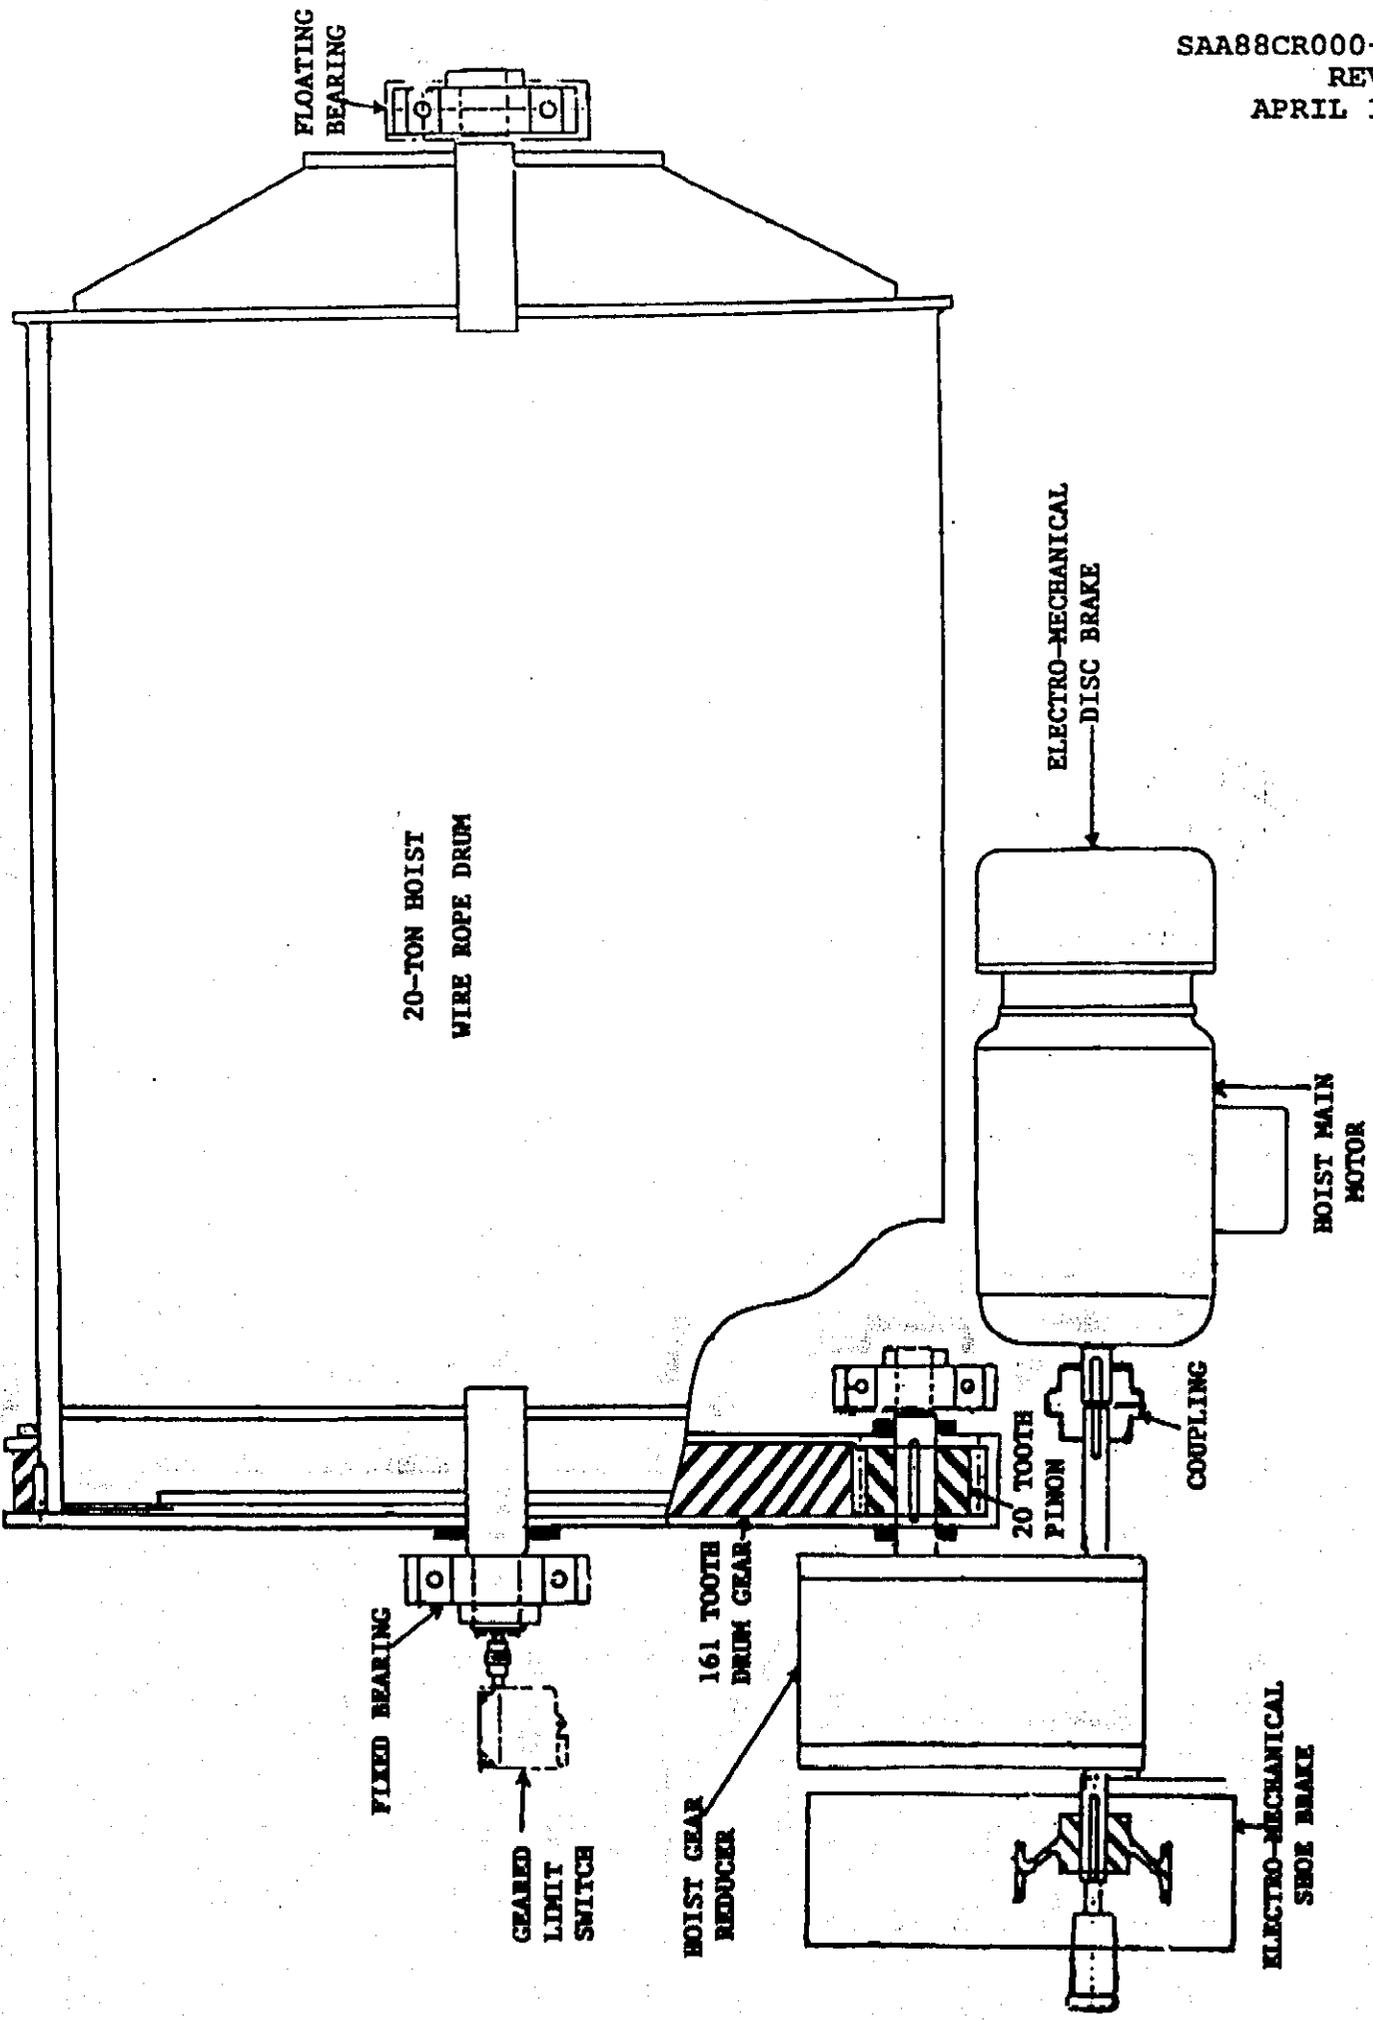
TON MST BRIDGE CRANE HOIST PHYSICAL LAYOUT
